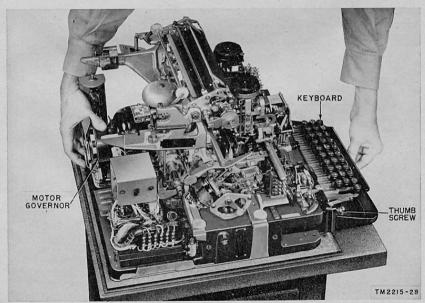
Sliding keyboard into front of base and typing unit while rotating motor by hand.
